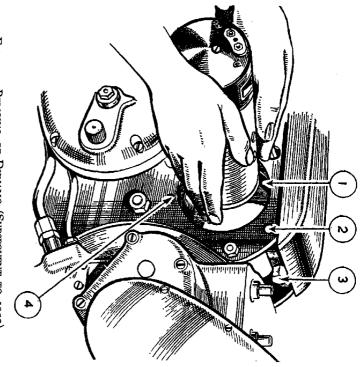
Removal of Dynamo (Subsequent to 1952)
